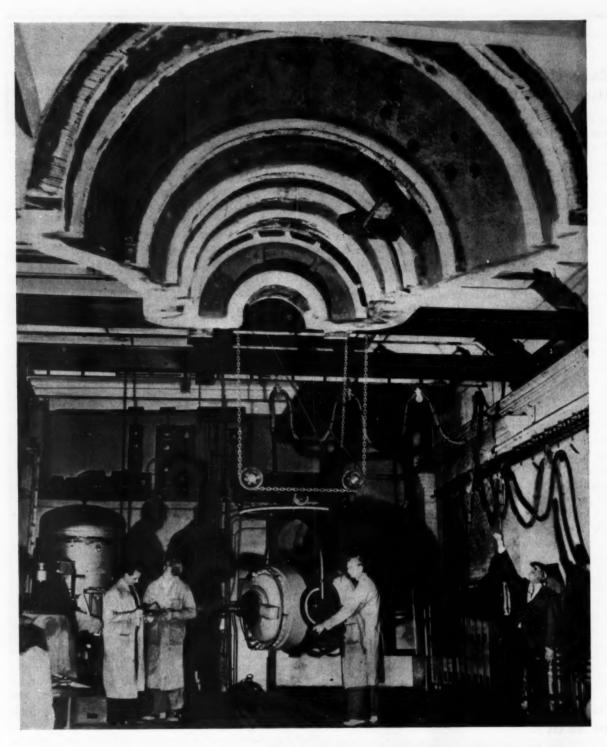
Lowering a large turbine casting through the roof of the G. E. X-Ray Laboratory preparatory to radiographing with a million volts
